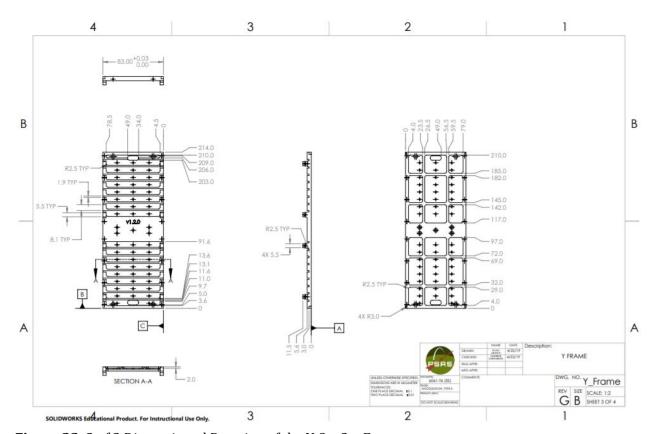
2 of 3 Dimensioned Drawing of the Y OreSat Frame
